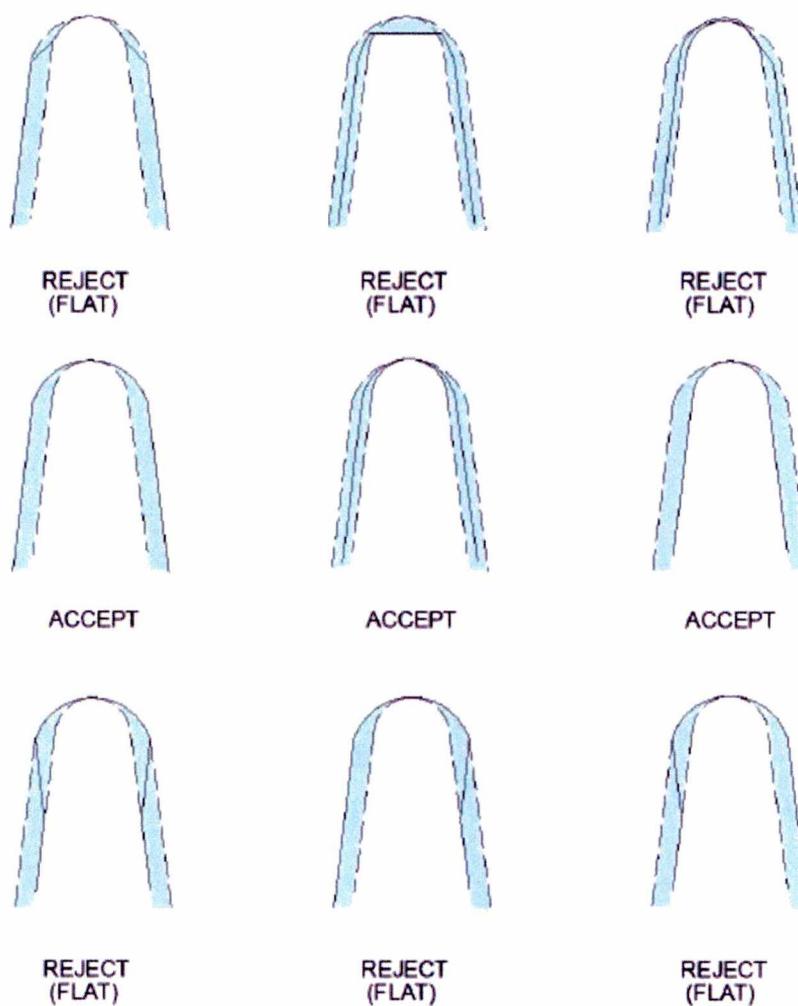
, Sheet 5: LP compressor fan blade assembly – Repair details and dimensions (Sheet 5 of 89)
